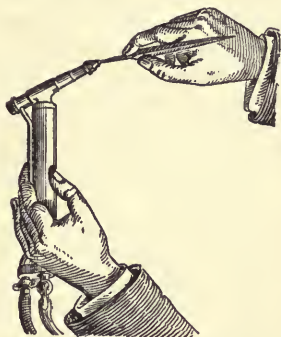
The scraping of the nozzle should not be done with a tool which might enlarge the nozzle.
